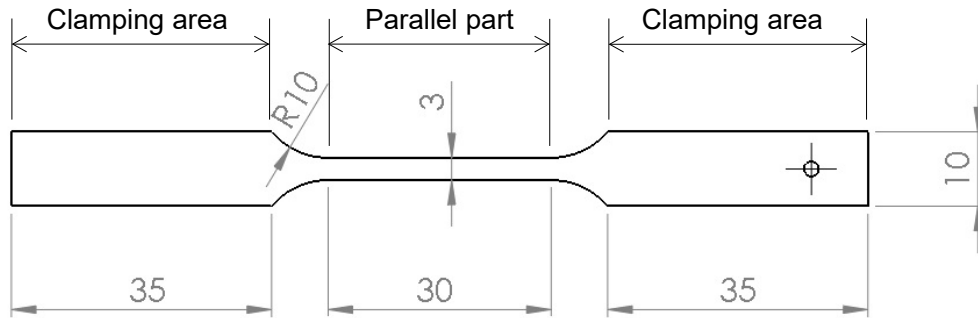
Shape and size of a test sample of small thin rolled plate (mm).
